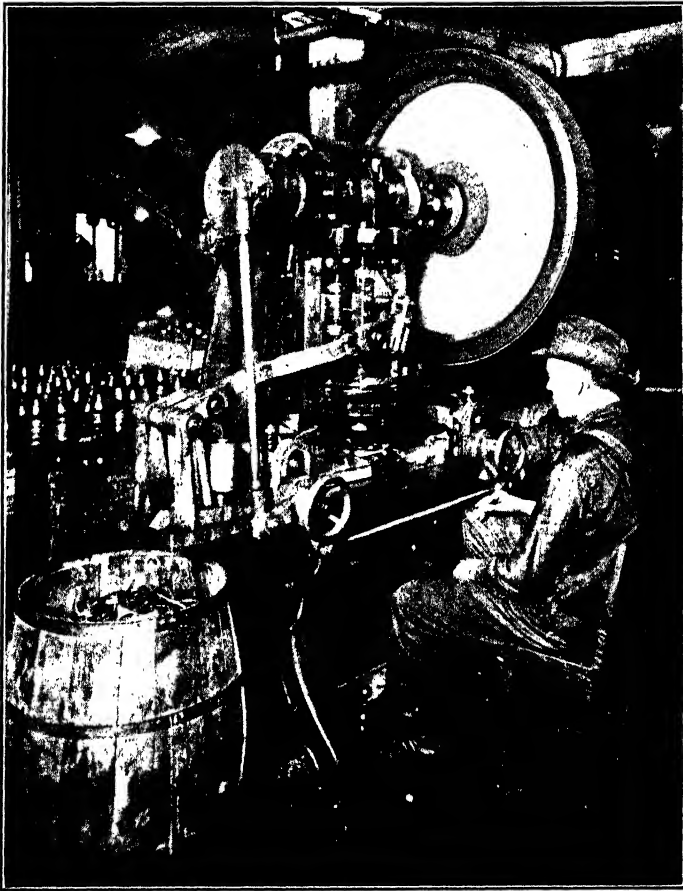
A double-action cam press equipped with a combination die, blanking and drawing a shell and pushing it out through the die.
